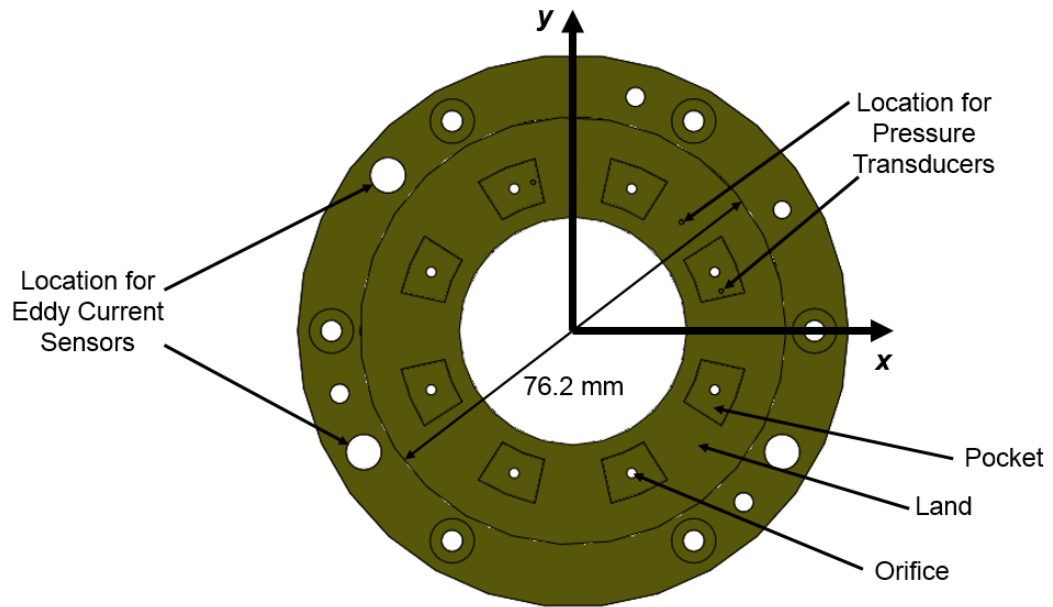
Depiction of water lubricated test thrust bearing. Orifice diameter = 1.55 mm. Reprinted from [12].
